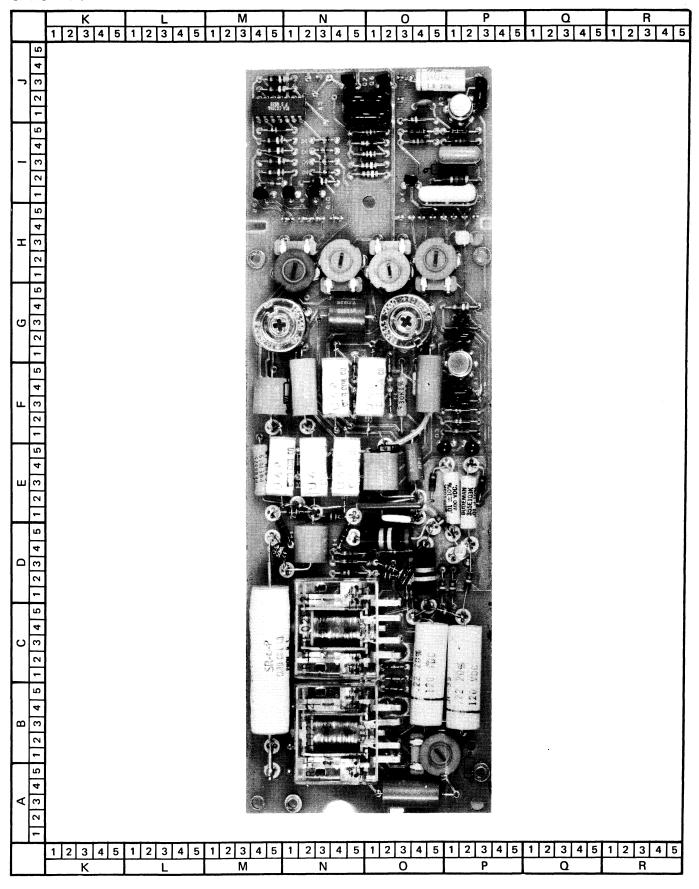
MILLIVOLT/OHMS CONVERTER P/C ASSEMBLY
